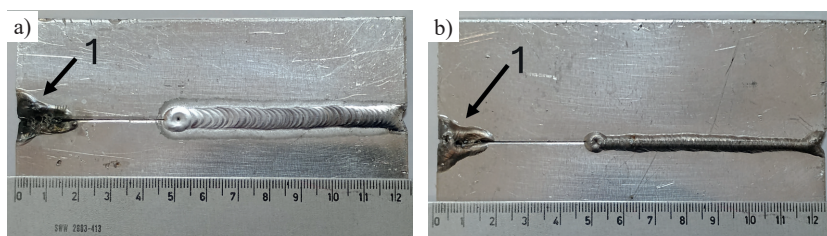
Butt joint of 2 mm thick sheets using the TIG method: a) weld face; b) weld root
